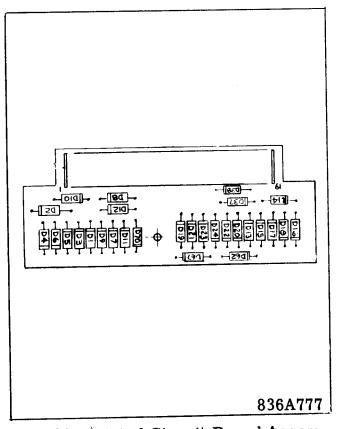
Printed Circuit Board Assembly for SDG, SDG-1,2,3 & 4 Relays
